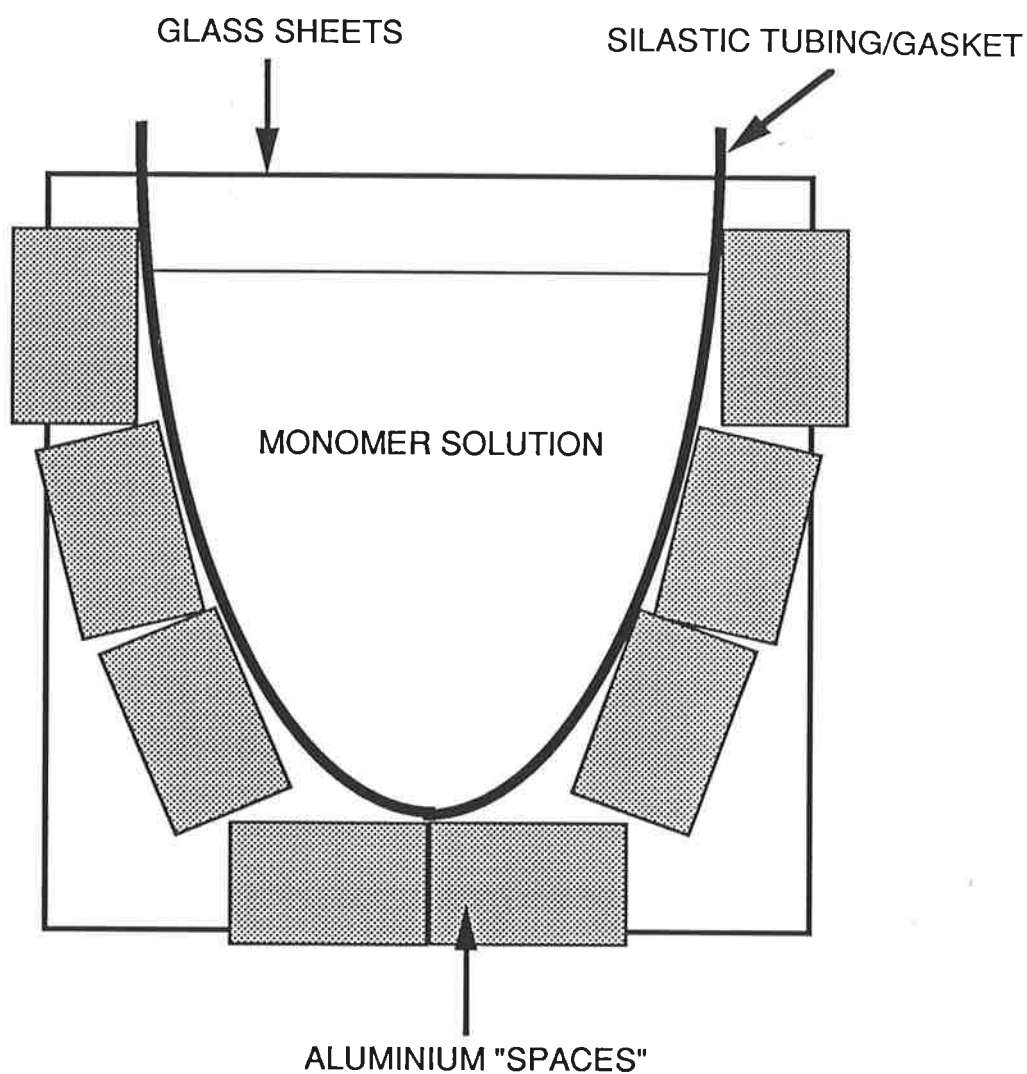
Sample casting between glass plates and using Silastic tubing as a gasket. "Bulldog" clips were used to clamp the cast assembly.
